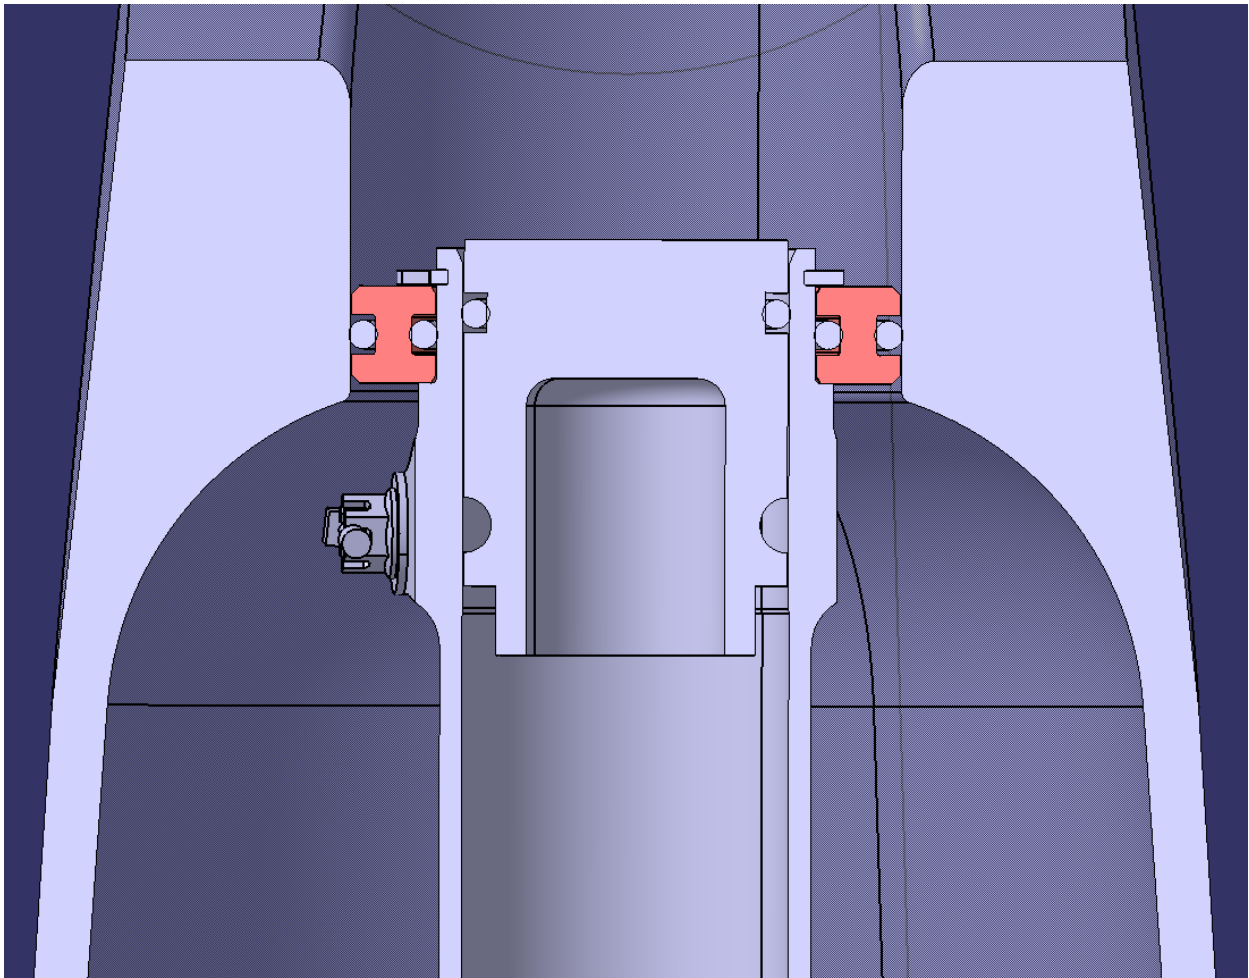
Option 1 Redesigned Support Tube Plug Interface with Support Tube
